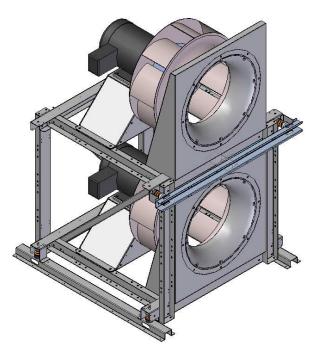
Double motor assembly – remove horizontal brace on front wall
